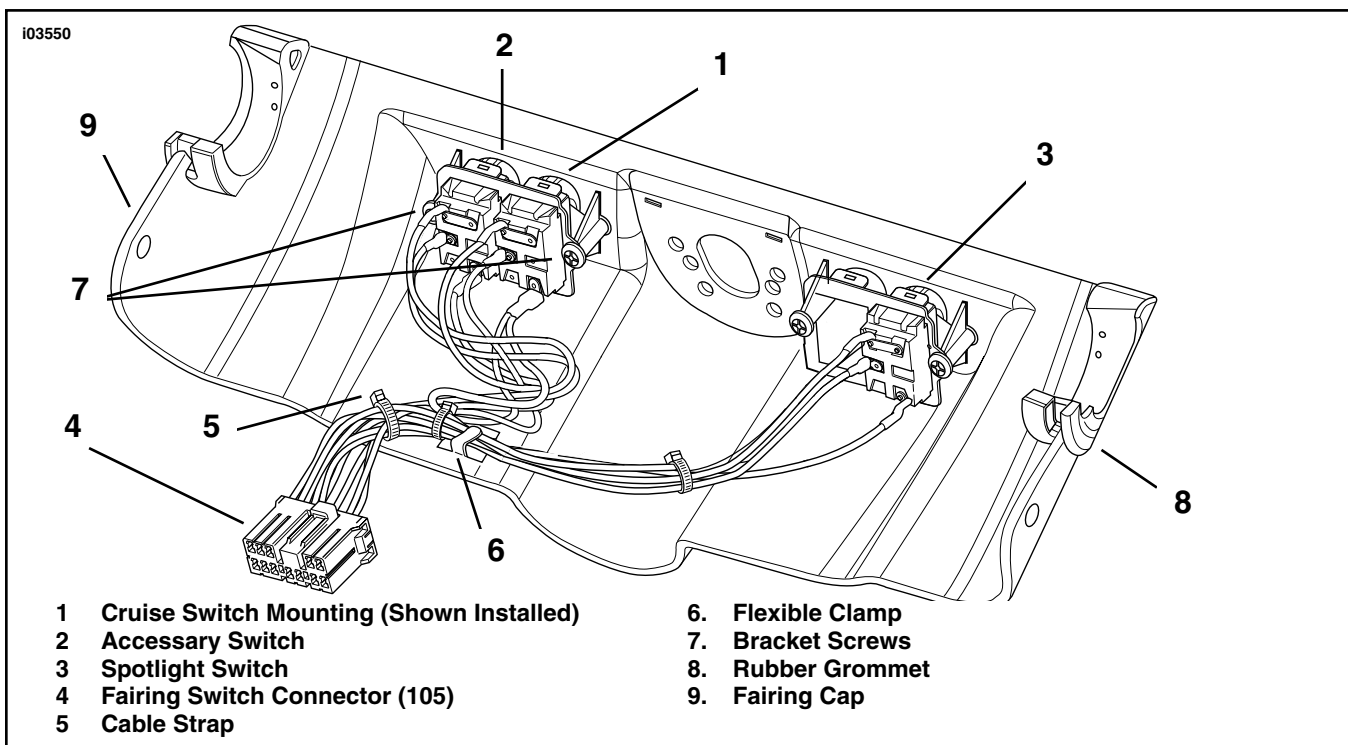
Fairing Cap (Inboard Side) Illustrating Cruise Switch Installed
